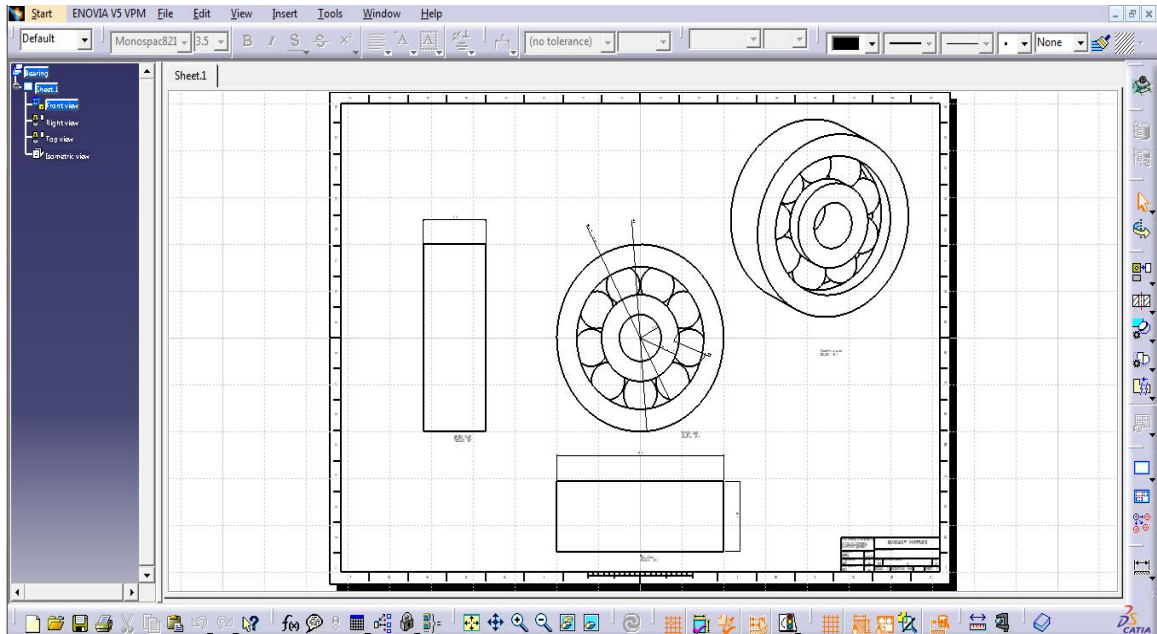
The upper and Bottom plate supporting led Bearing design and specification
